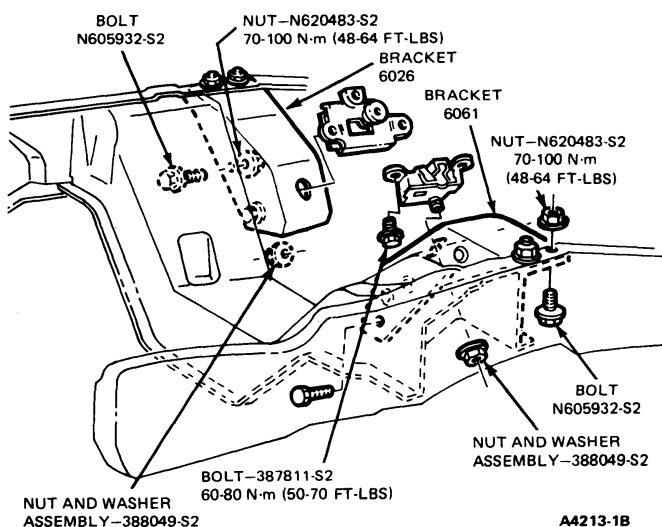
Front Supports and Insulators—F-100—F-350 and Bronco
